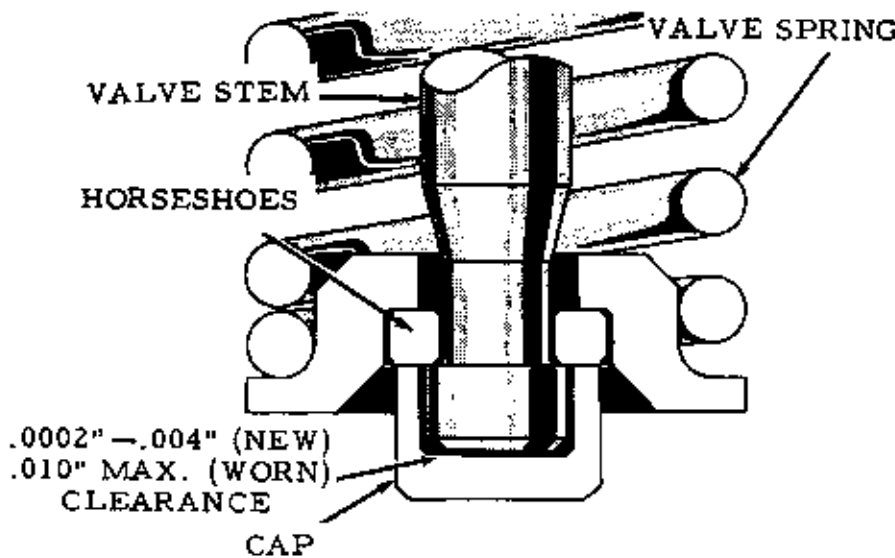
Section of release type (Free Valve) exhaust valve rotator. Note required clearance between stem and cap.
